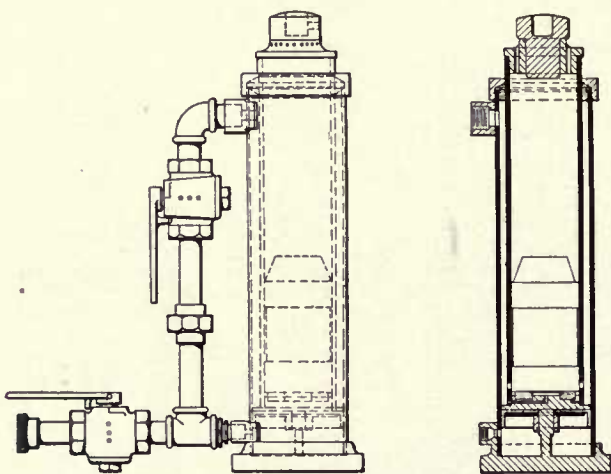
Pneumatic Hammer for Driving Out Bolts.
